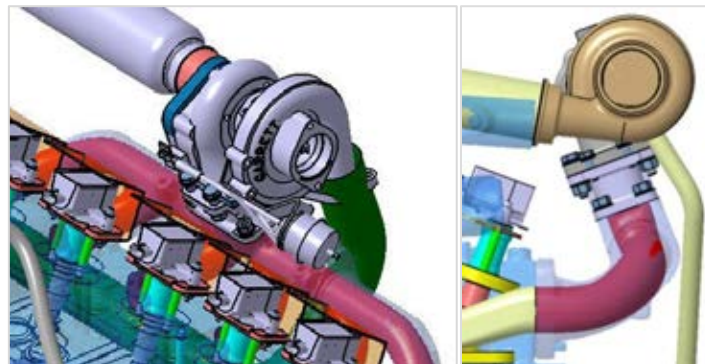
Turbocharger assembly and designed spacer to adapt different turbochargers
